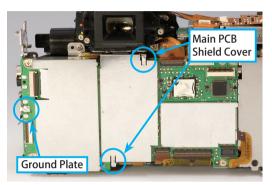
Soldering Position for Main PCB Shield Cover and Ground Plate
